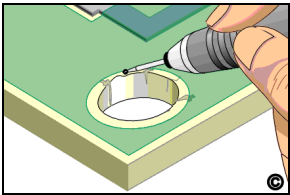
Mill away damaged material with the Micro-Drill and ball mill.
